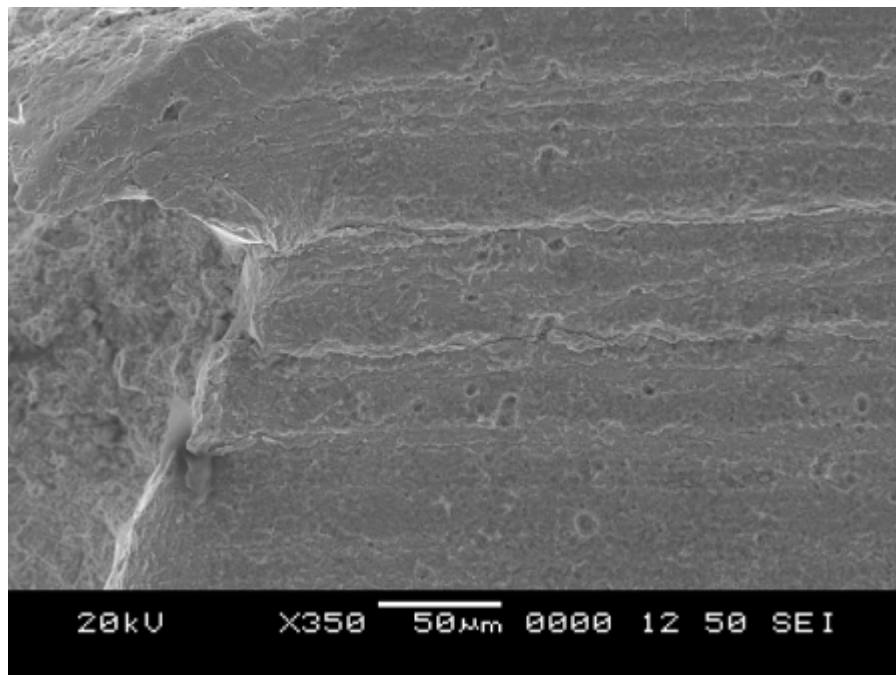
Tooth 29 root, gear half, coast side tool marks, cracking along tool marks.
